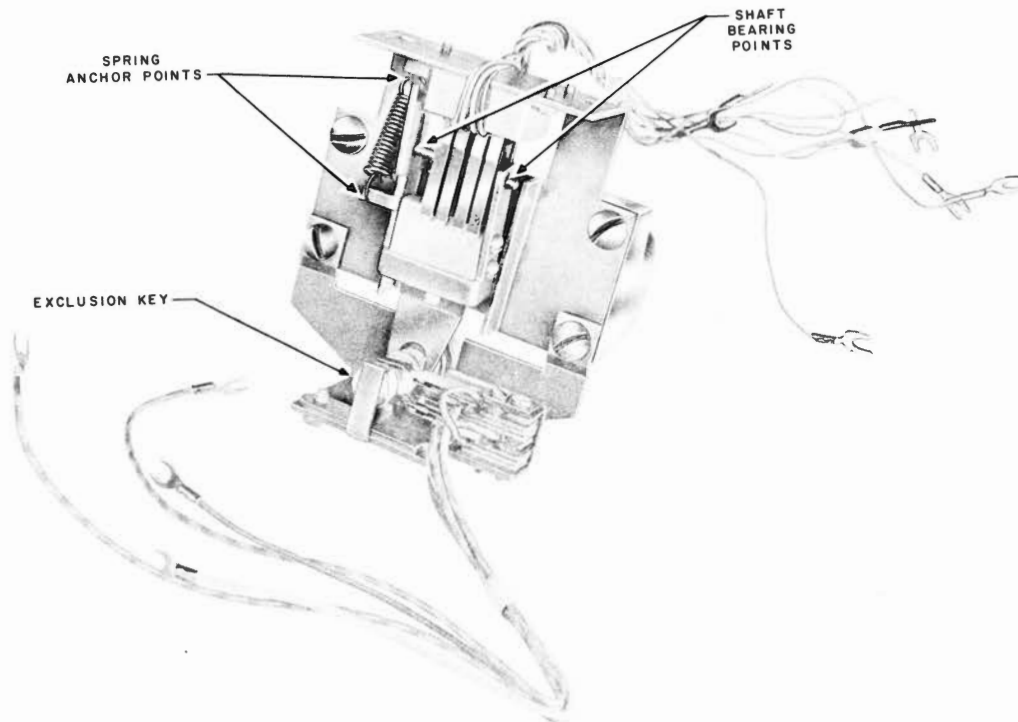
Operating Bracket Switchhook Assembly for 751-Type Telephone Set
